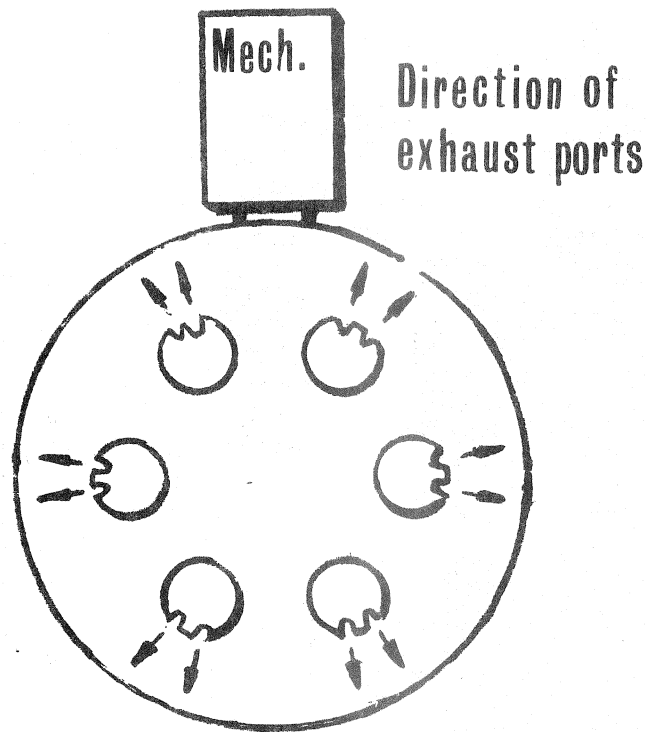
View Showing the Direction in which the interrupter exhaust ports point
